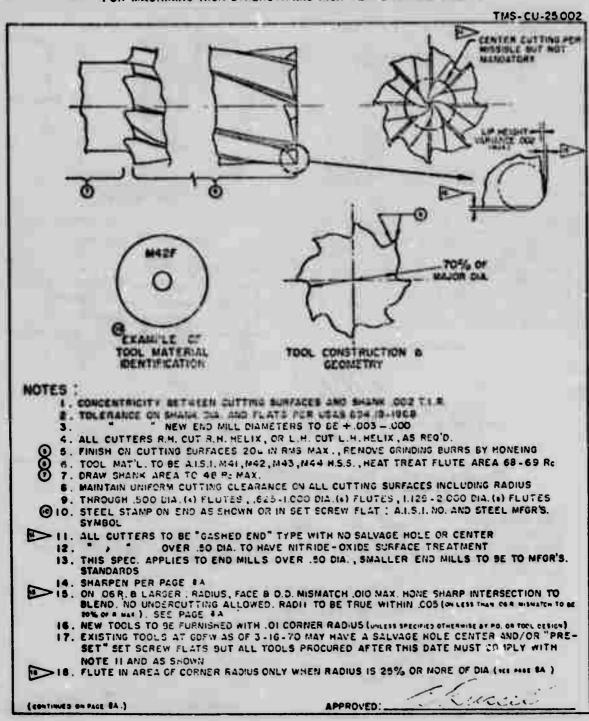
CUTTING TOOL SPECIFICATION - 4, 6 & 8 FLUTE END MILLS
